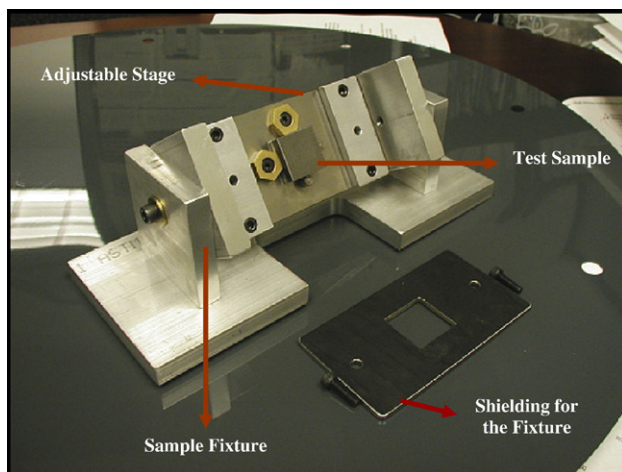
The experimental set up used for the sample fixture showing the test sample, adjustable stage and shielding for the fixture.
